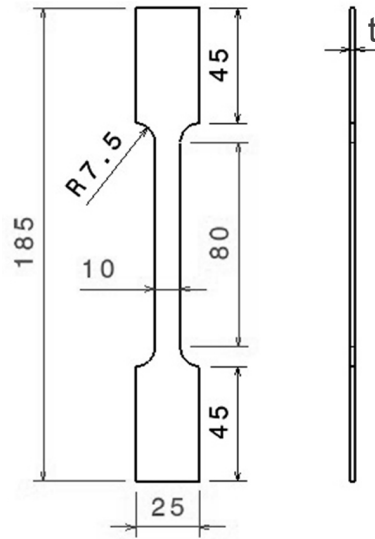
Dimensions of the uniaxial tension specimen of DP600 sheet
